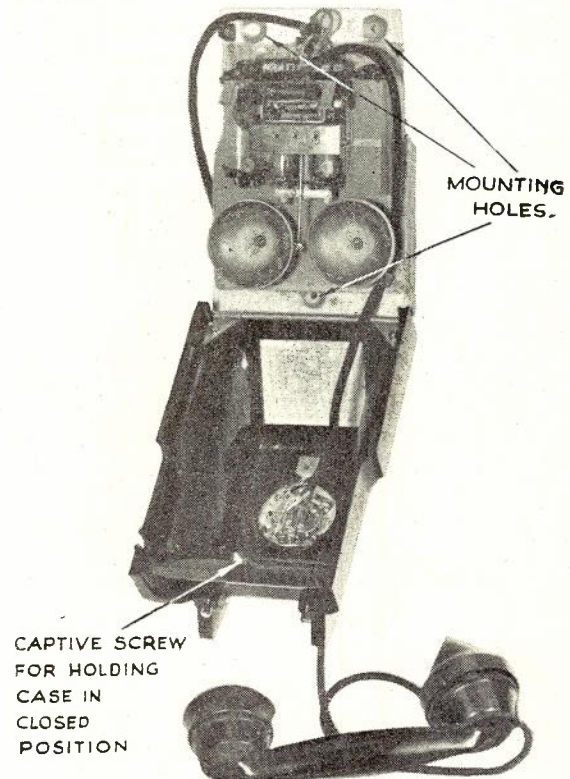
Telephone 300 A.W. View of Complete Assembly Before Case is Closed.
